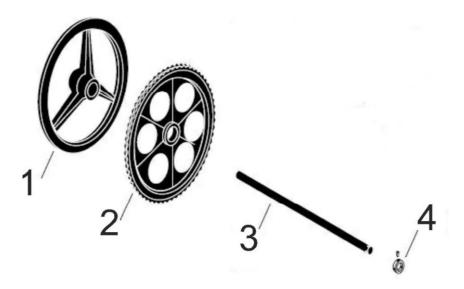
Elements of the MCB/MCW roller working section: 1- plain wheel, 2- gear wheel, 3- roller axle, 4- retaining ring.
